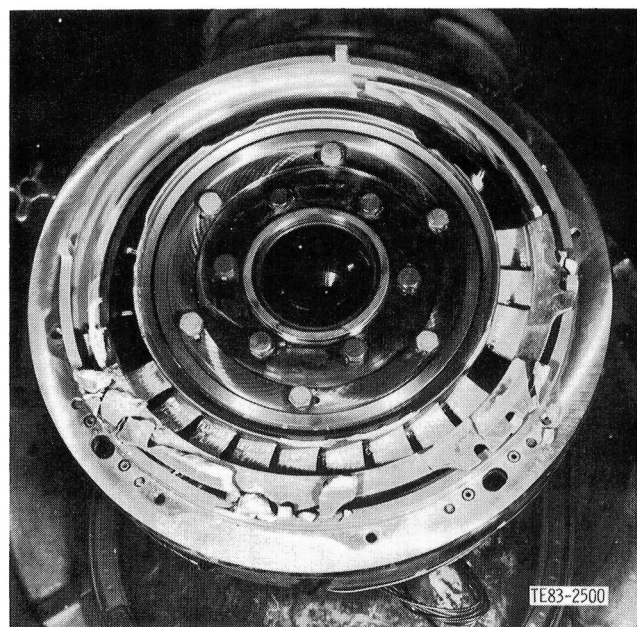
Gasifier nozzle after removal of rotor of engine C-4, TD14.
